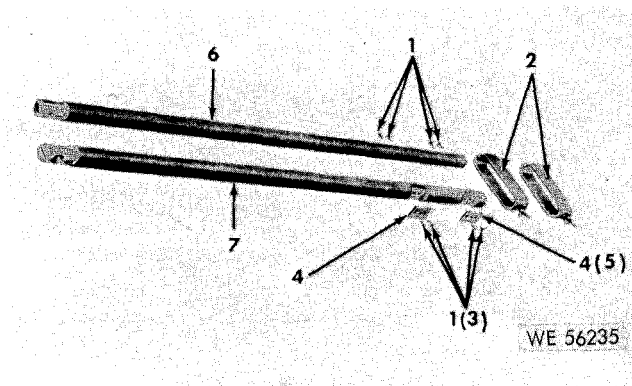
Upper leg 5313953 and 5313954-exploded view.
